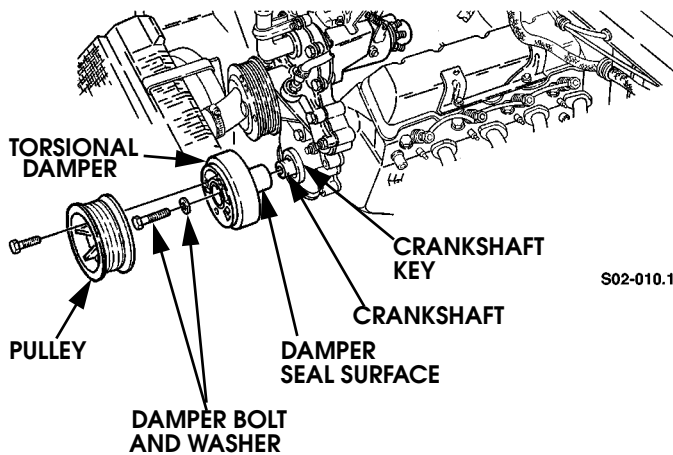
Torsional Damper and Crankshaft Pulley Mounting
